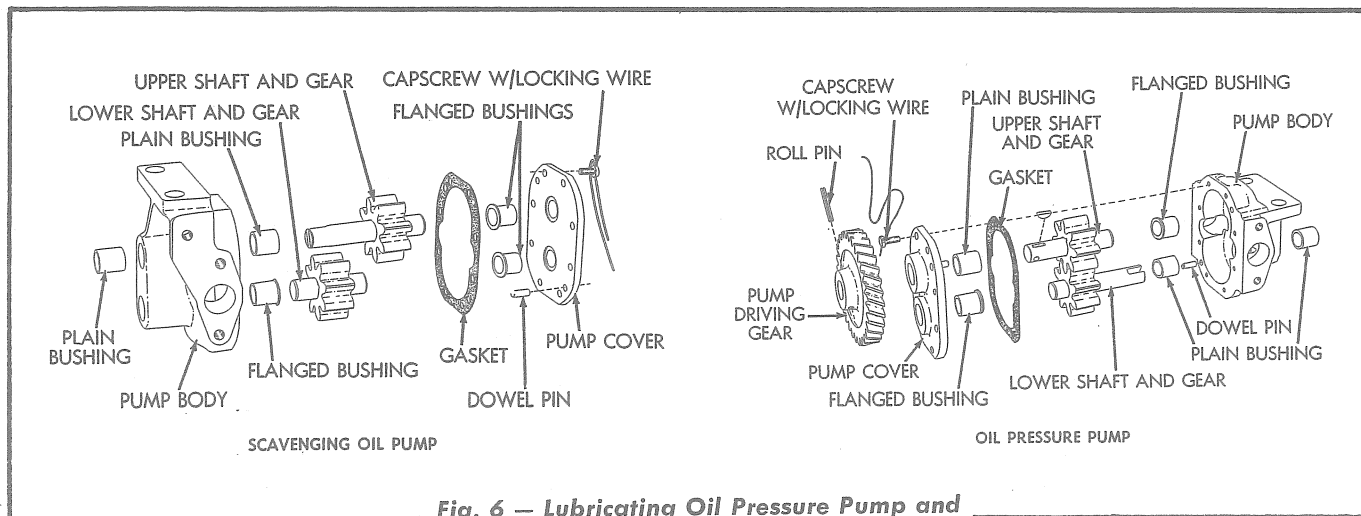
Lubricating Oil Pressure Pump and Scavenging Oil Pump Details (Tractors Serial No. 4001 and Above)
